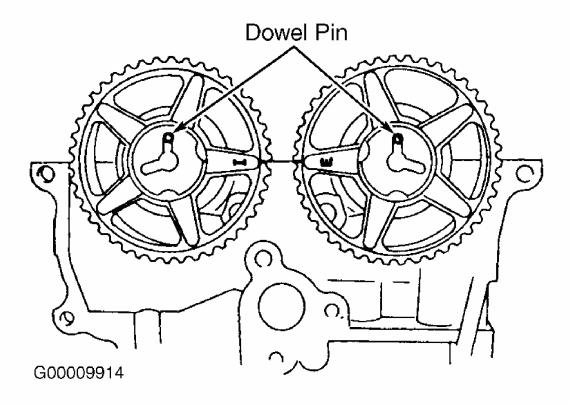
Installing Camshaft Sprockets (Protege) Courtesy of MAZDA MOTOR CORP.
